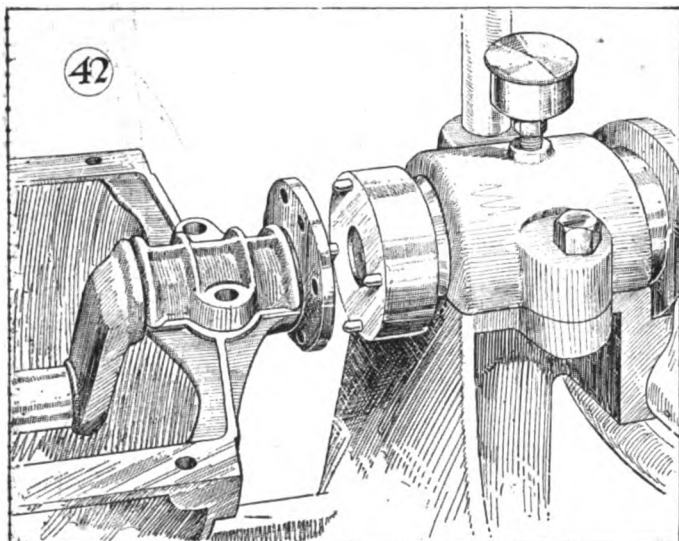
Details of the driving head of the burning-in machine. The lugs engage the holes in the flywheel flange
